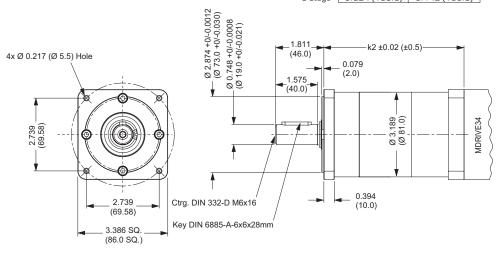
Planetary Gearbox Specifications for MDrive34AC Plus
